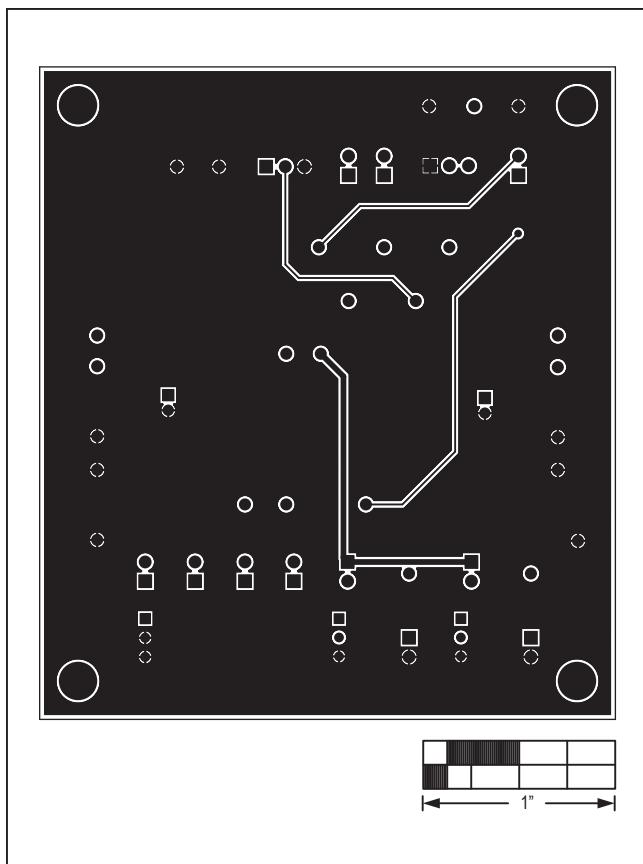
MAX14691 EV Kit PCB Layout—Solder Side
